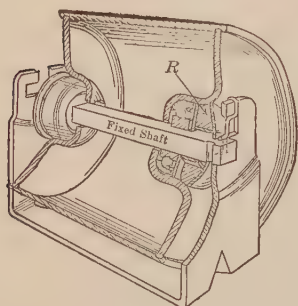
Stephens-Adamson Ball-bearing Pulley.
